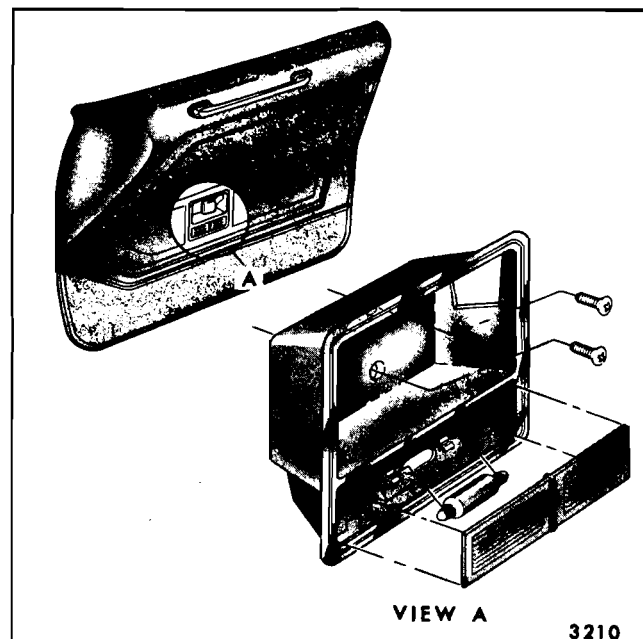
Remote Control Cup and Courtesy Lamp Assy. - Cadillac Styles
